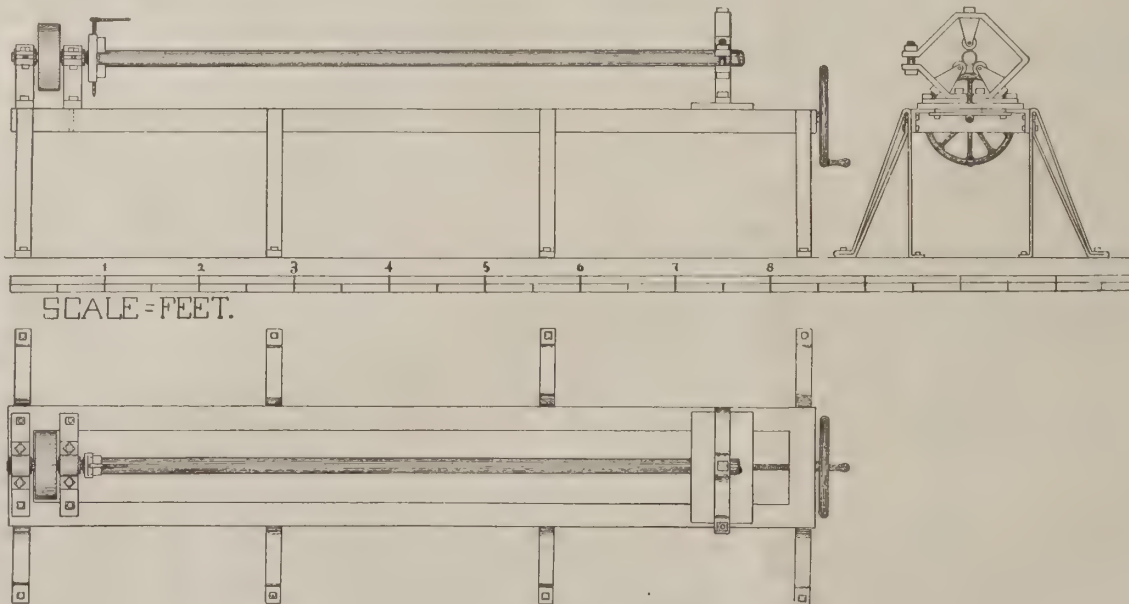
Elevation and Plan of Tube Scaling Machine.
